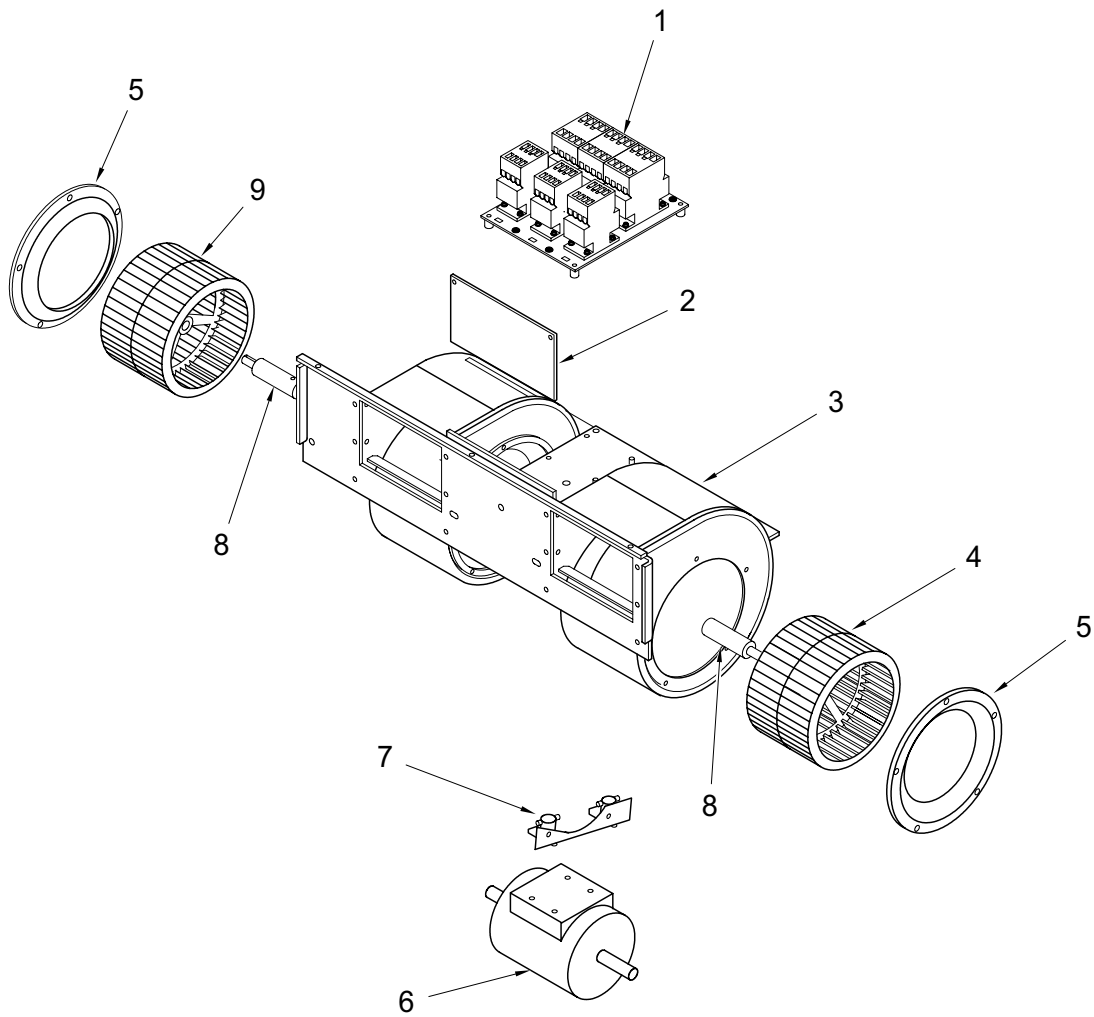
EVAPORATOR BLOWER AND MOTOR ASSEMBLY - COMPONENTS
